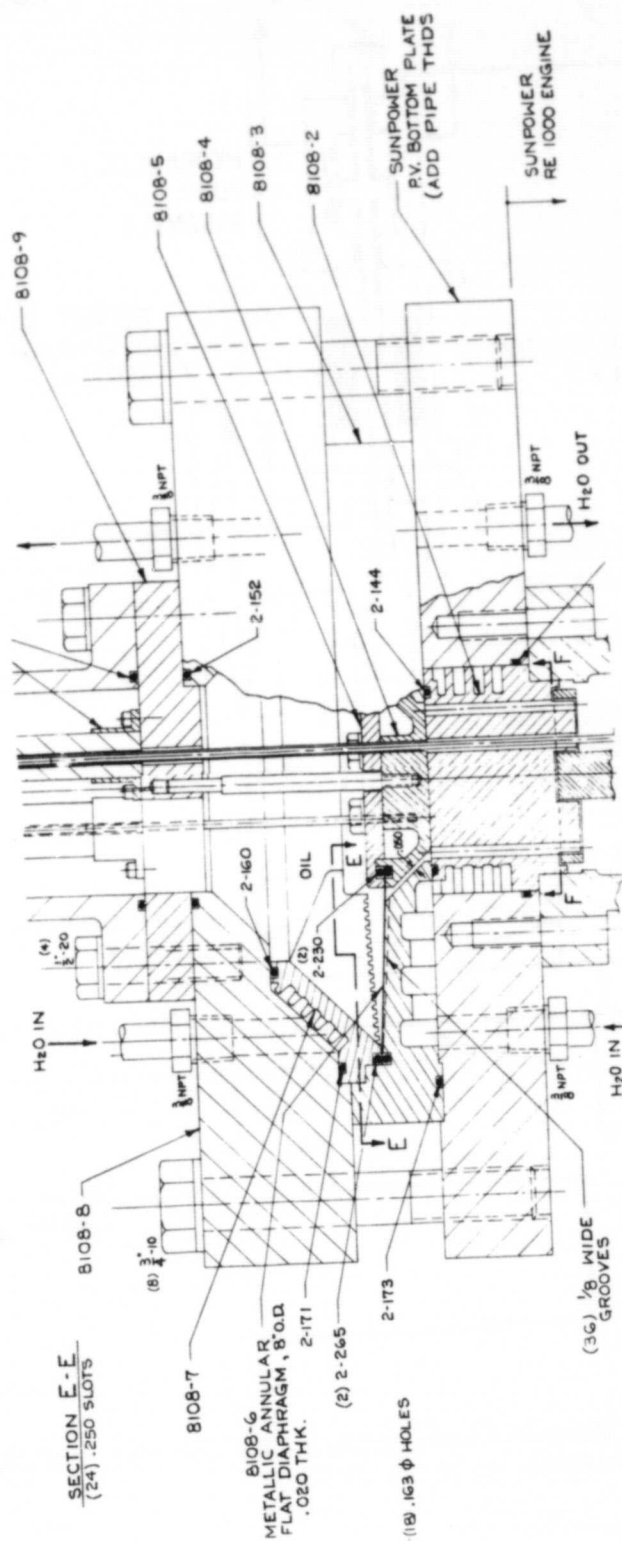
Sectional layout of the diaphragm assembly (dimensions in United States customary units)
